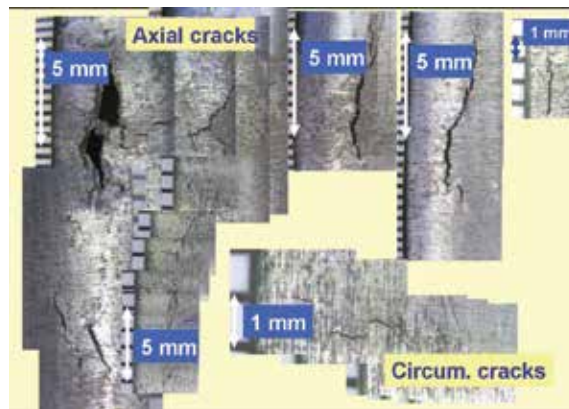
Feature of the cracks after the burst test of the KY56065 specimen
